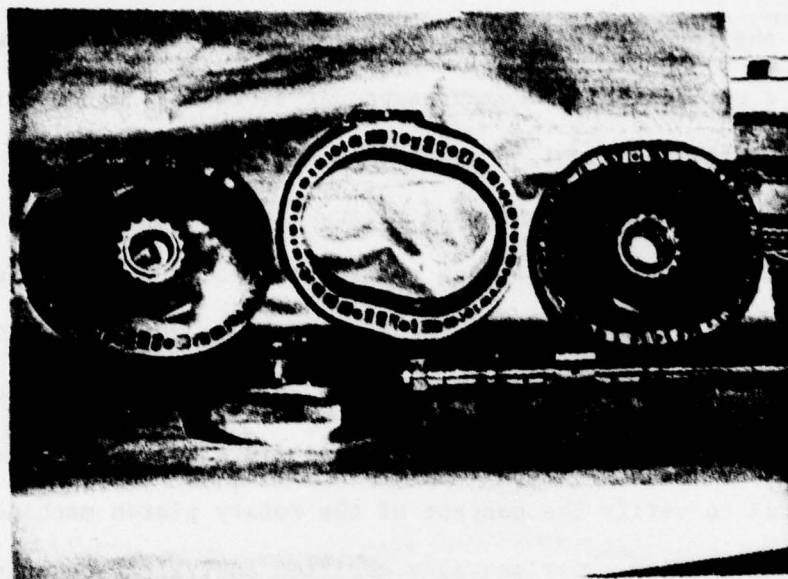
Basic RE1-60 Rotary Piston Expander Components
